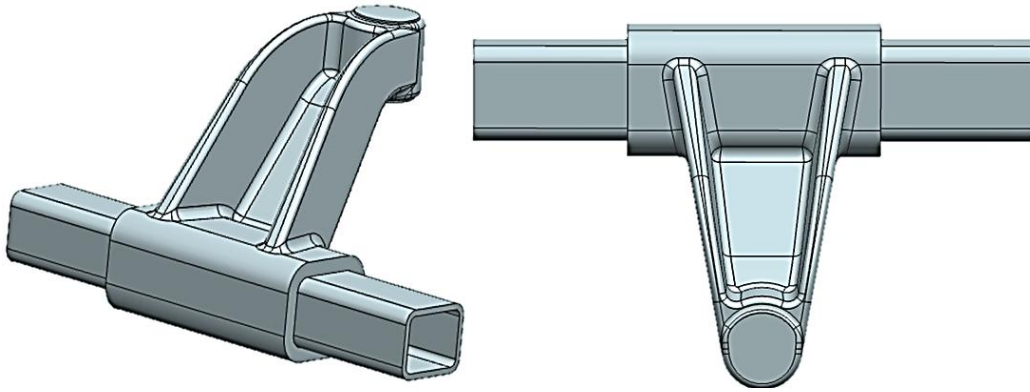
CAD drawing of the original hybrid left front cradle mount middle.
